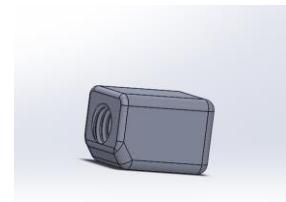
3D drawing of connecting components of the tip of 2nd prototype
